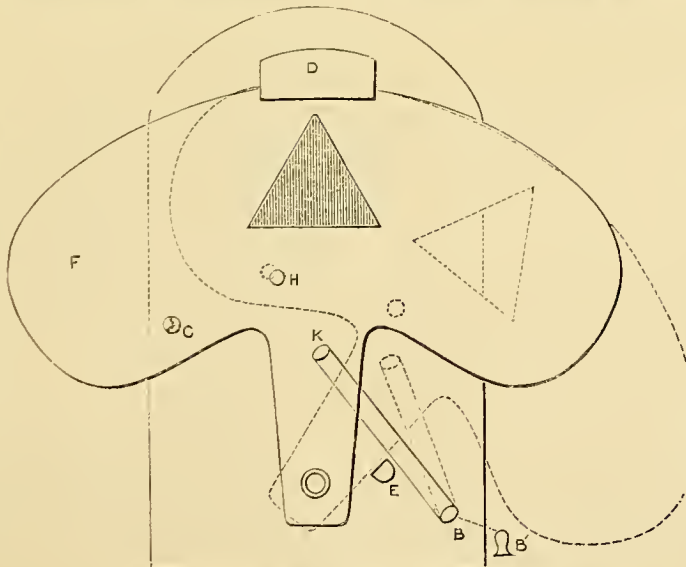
FRONT VIEW OF SHUTTER WHEN COMPLETED.—FULL SIZE.
